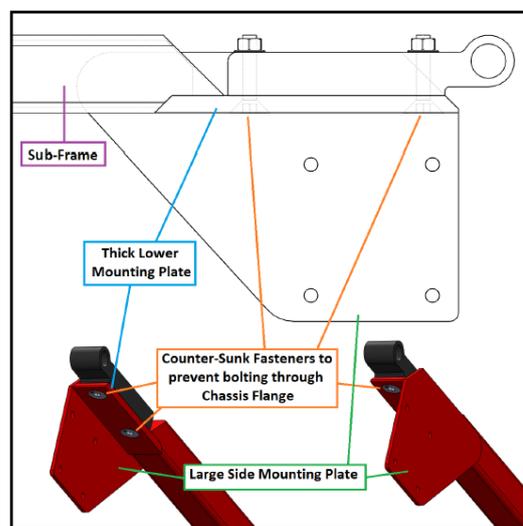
Countersunk fasteners to prevent bolting through chassis frame
